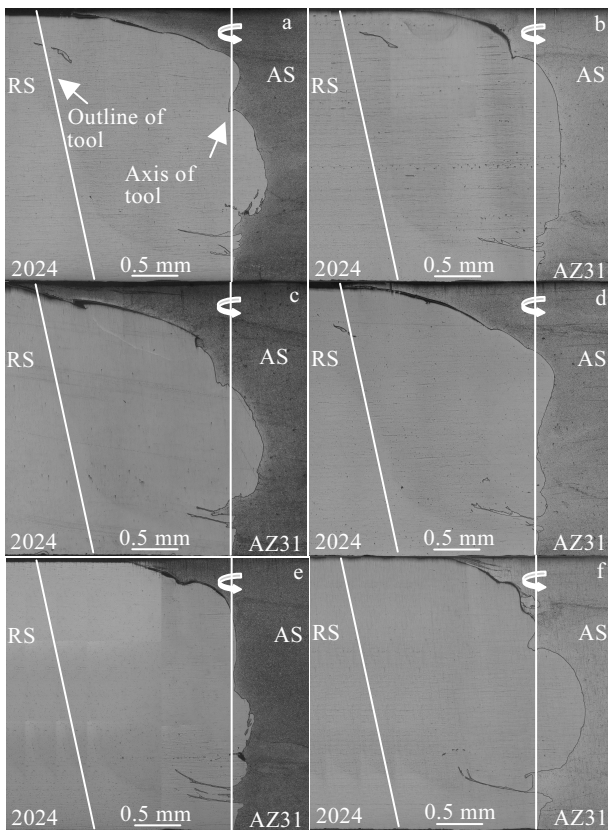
Cross section images of different positions in welding direction: (a) $x=0$, (b) $x=0.4$ mm, (c) $x=0.8$ mm, (d) $x=1.2$ mm, (e) $x=1.6$ mm, and (f) $x=2.0$ mm
